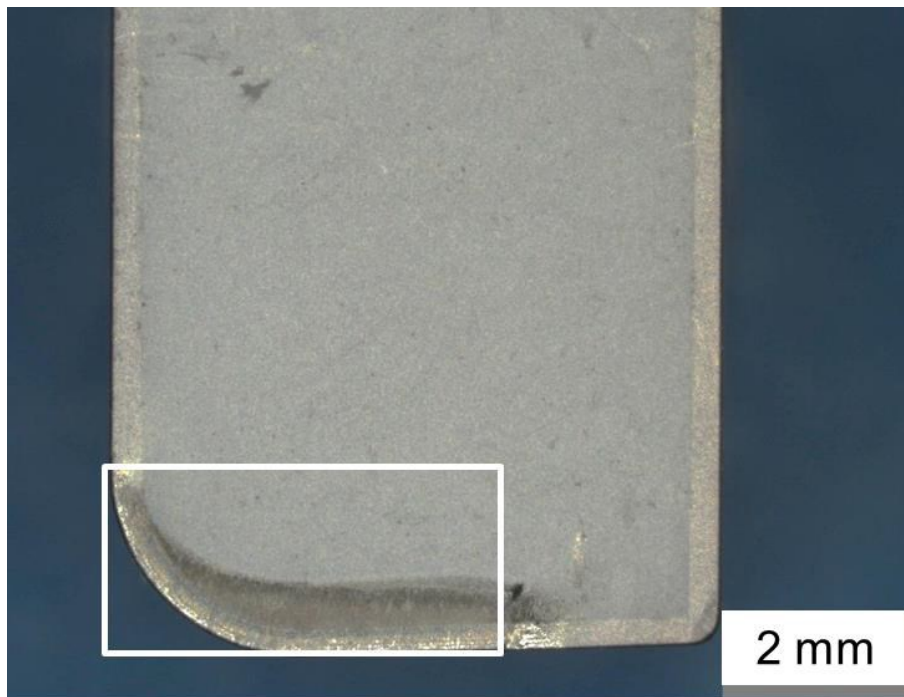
Top view of a milling insert after cutting 51.44 m aTWCL (accumulated tool-workpiece contact length corresponding 1000 tool-workpiece contacts) under test setup A conditions. The white square indicates the area of residual stress measurements [59].
